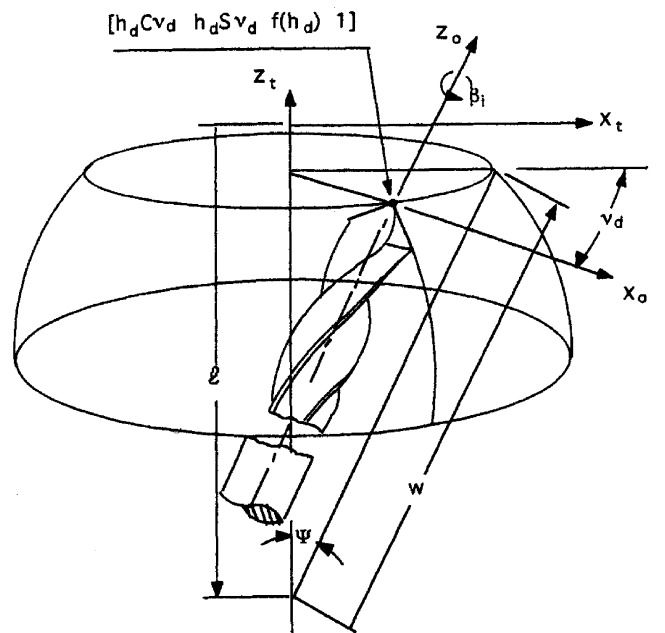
Grinding of drill flank surfaces by using form-grinding tool.
